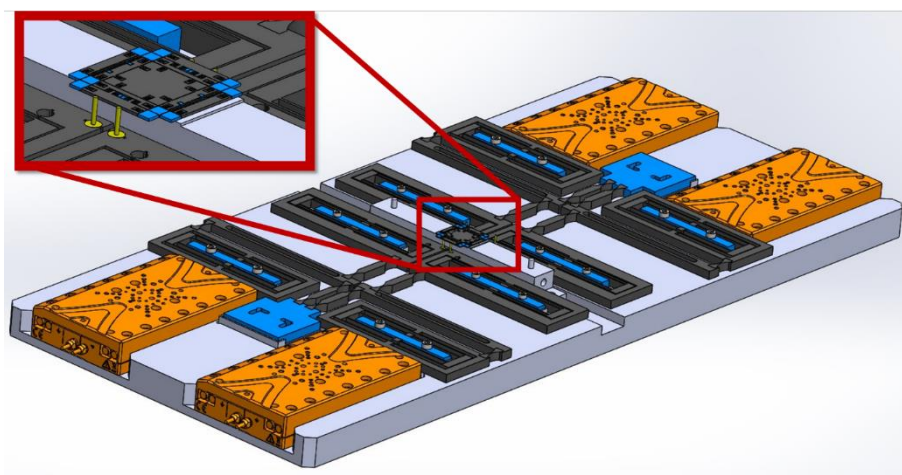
The overall assembly design of capacitive enhancement mechanism.
